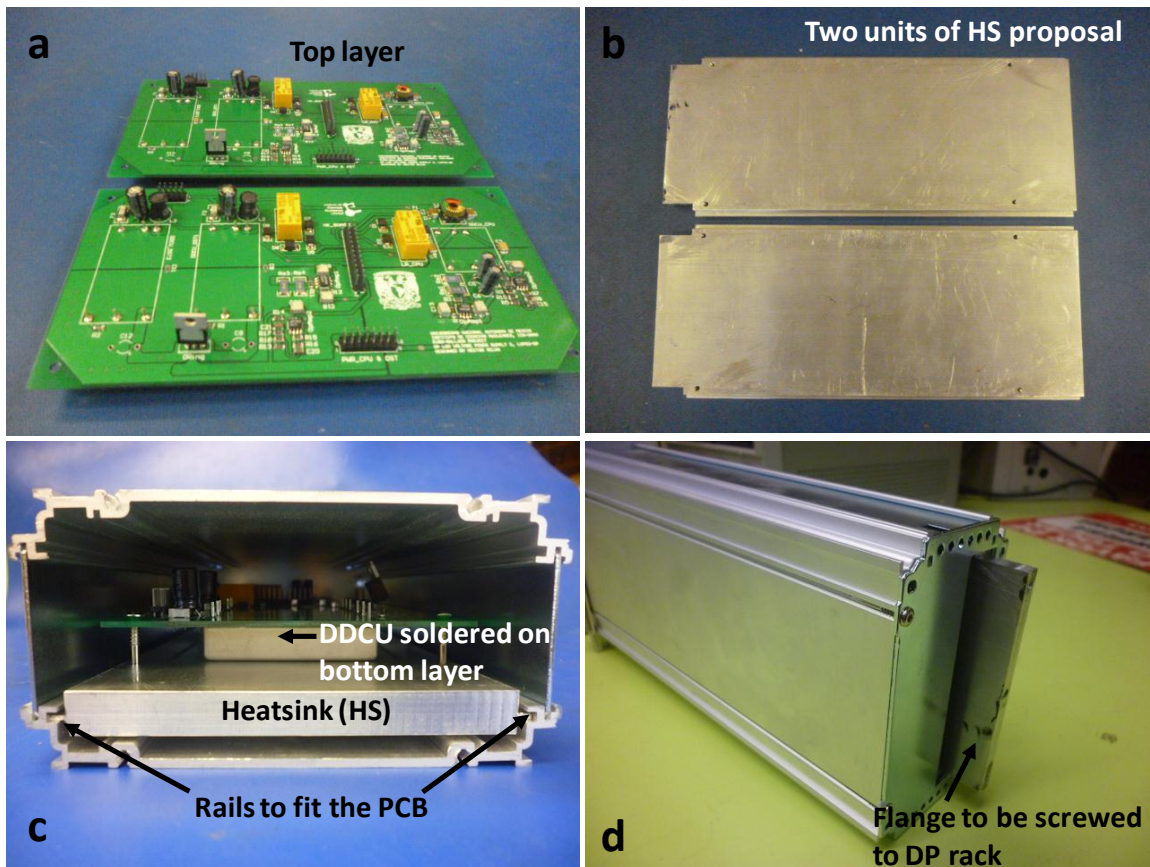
(a) Two PCB's of LVPS2-DP, (b) Two HS proposed, (c) PCB, HS and unit box assembly, and (d) HS rear side to be assembly with cooling plate of DP rack.
